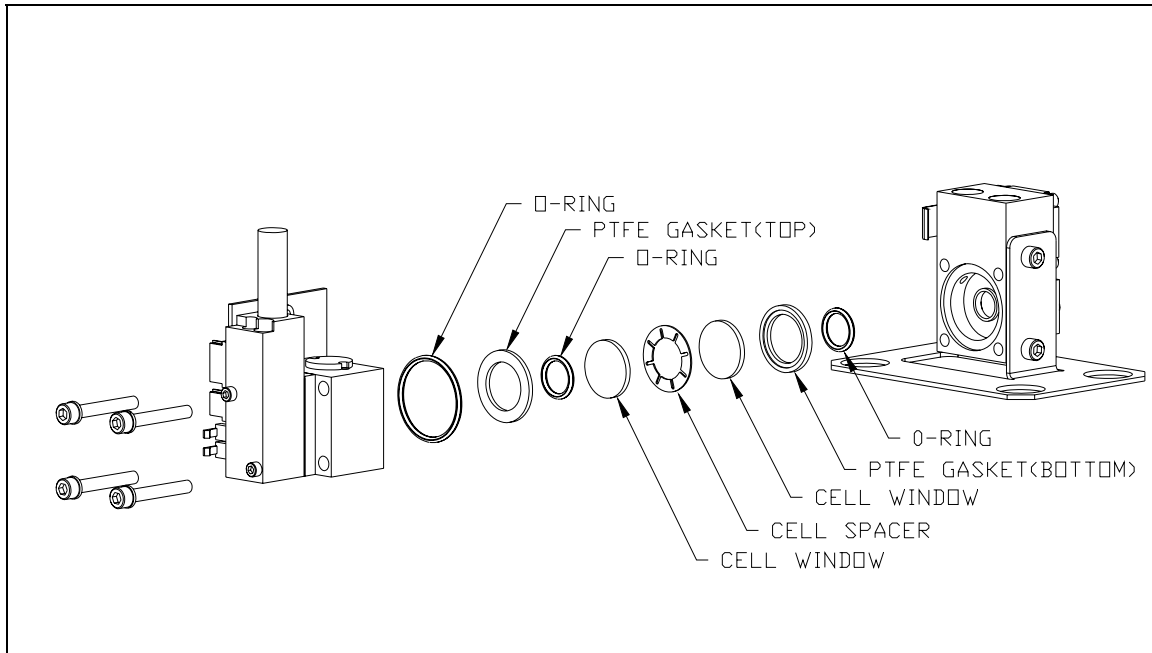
MEASUREMENT CELL DISASSEMBLY
